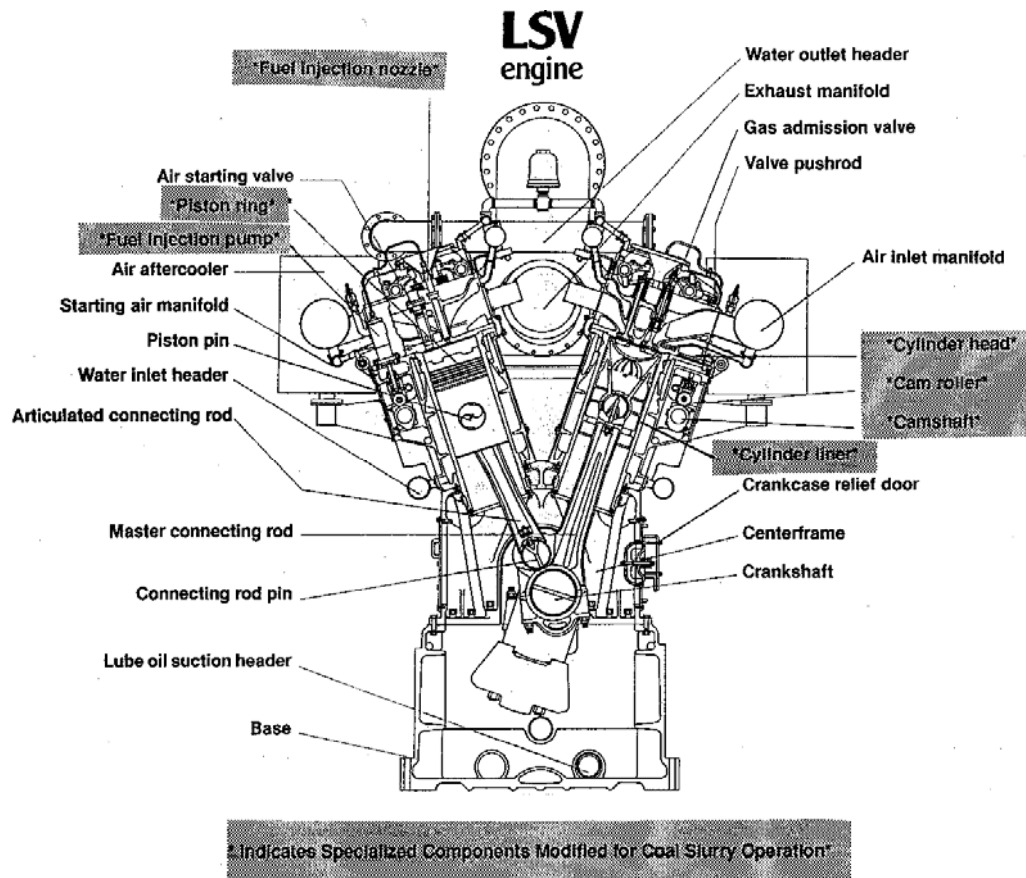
Highlights of Novel Coal-Fueled Diesel Engine Technology Elements
